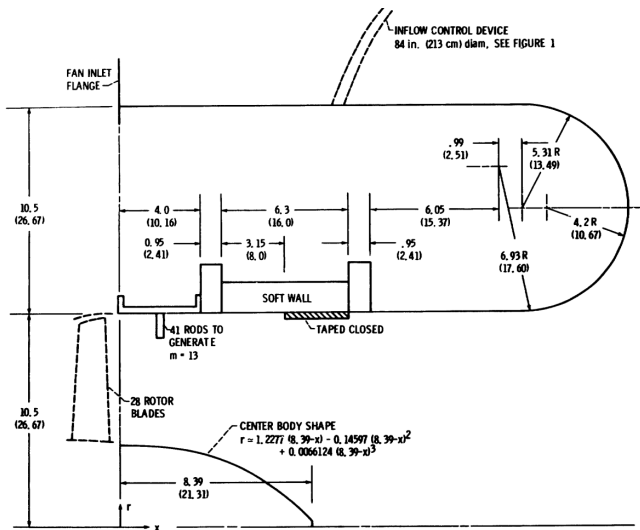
Detailed geometry of JT15D engine inlet [26]
